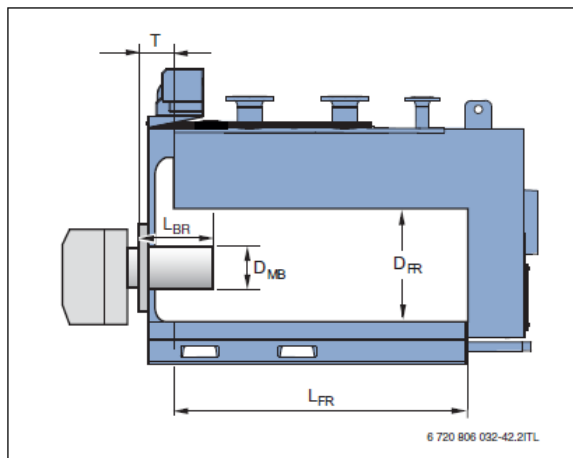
Dimensions, burner door and burner, Uni 3000F¹⁾
